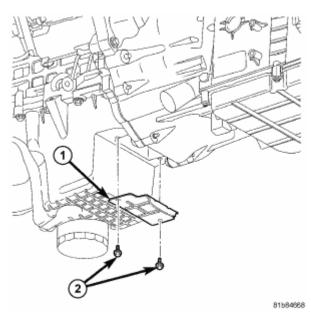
Flex Plate Inspection Cover & Fastener Courtesy of CHRYSLER LLC
